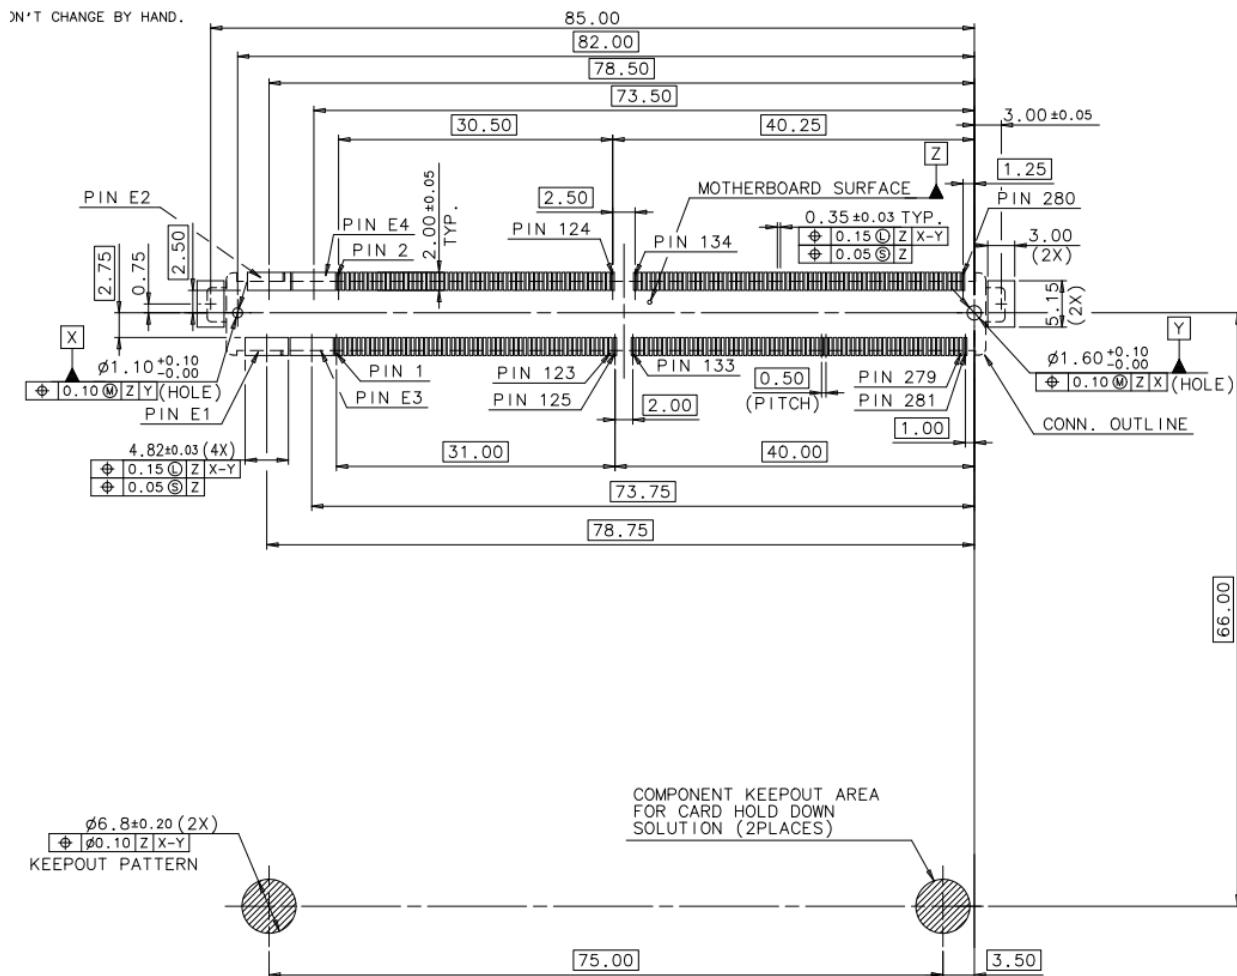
MXM 3.0 Carrier Packaging Connector
